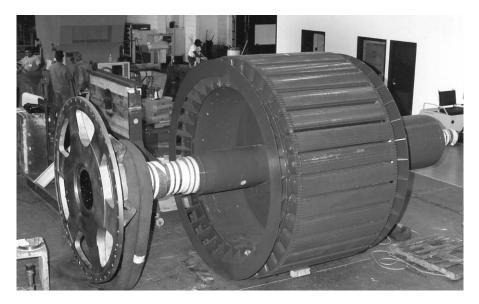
Photograph of a salient pole rotor for a large, low-speed motor. (Courtesy TECO-Westinghouse.)
